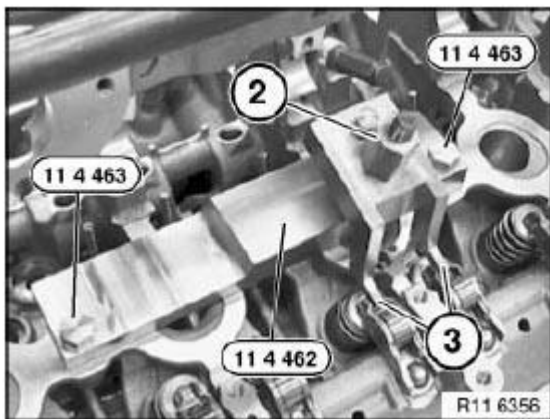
Identifying Cam Followers And Spindle Nut With Special Tools (11 4 463 And 11 4 462)
